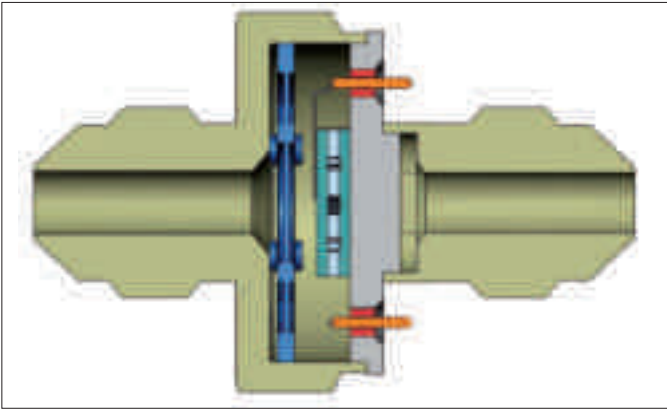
Flow through microvalve mounted in a typical pipe fitting. Electrical interconnect via a glass bead insert. Integral filter shown on the inlet side.
